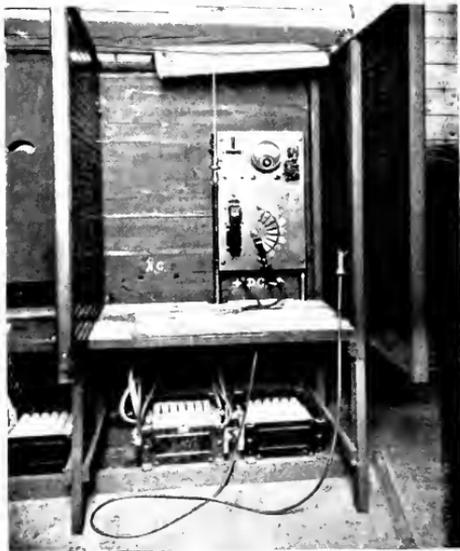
Direct-current Resistance Welding Equipment
